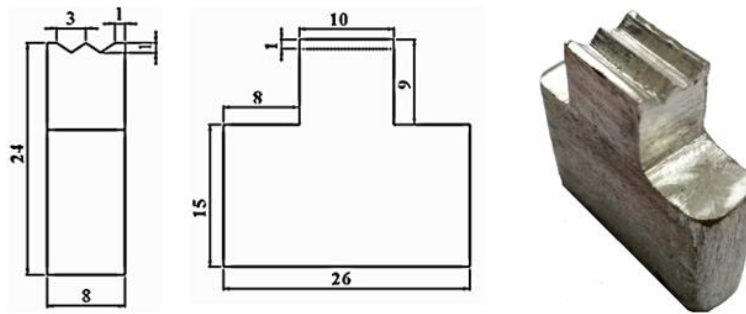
(a) Side; (b) front view of the workpiece; and (c) photograph of the workpiece.
